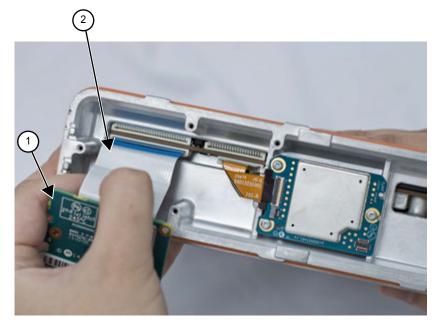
Expansion Board Flex Removal (Image May Not Match Exact Product)
